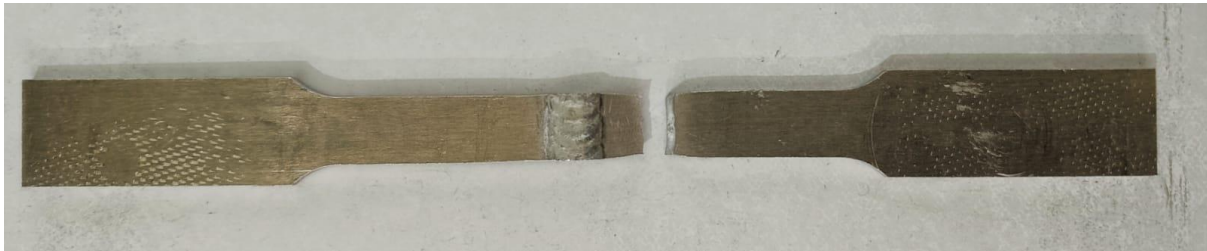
Fractured weld specimen E8 of ER4043
